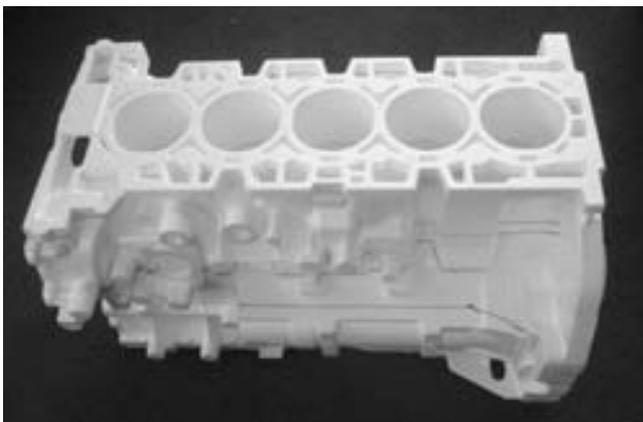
A Styrofoam casting mold used to make the five-cylinder engine blocks for the Chevrolet Colorado and the Hummer H3. The brown lines are glue used to hold the various parts together. Sand is packed around the mold and molten aluminum is poured into the sand, which instantly vaporizes the Styrofoam. The aluminum then flows and fills the area of the mold.
